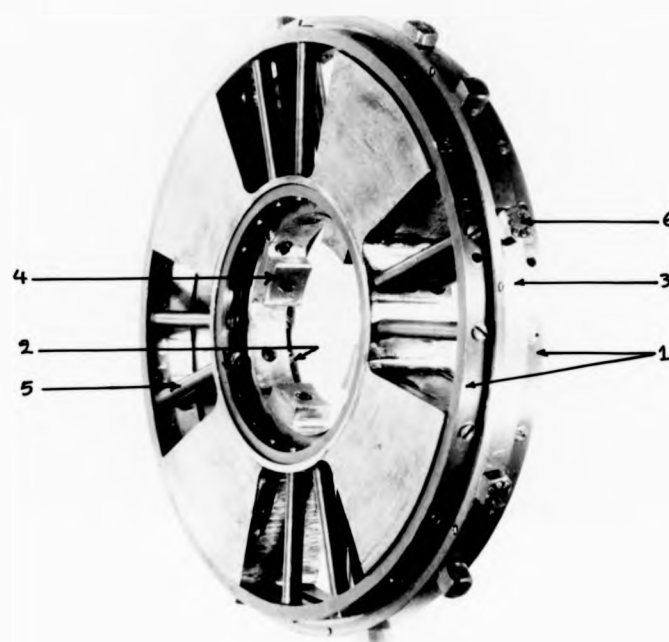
The rotor of the first prototype a.c. axial field disc motor after some of the iron has been machined for experimental studies in ref. (1.5).
